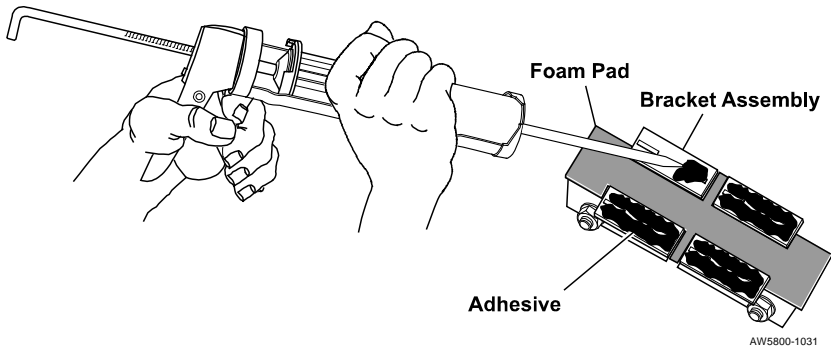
Applying Adhesive to the Bottom of the Bracket Assembly
